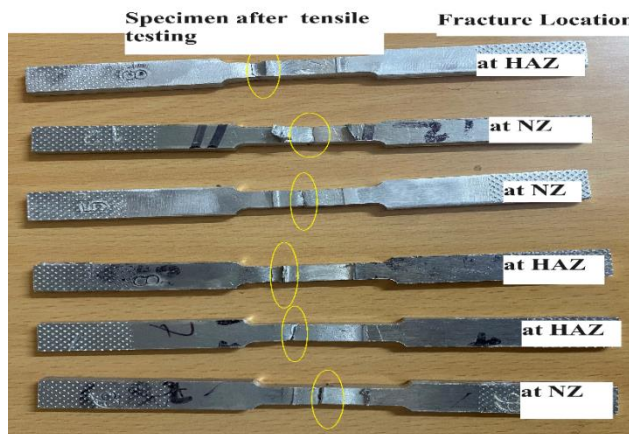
Tensile specimens of welding aluminium alloys and failure locations
